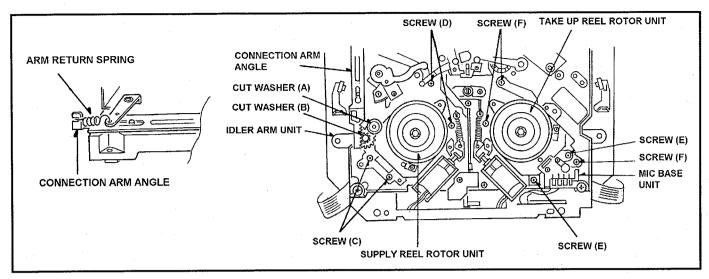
Removal of Supply & Take Reel Rotor Unit
